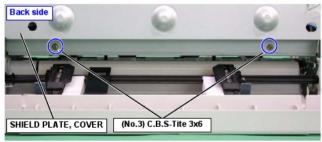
SHIELD PLATE, COVER Removal (Back Side)
